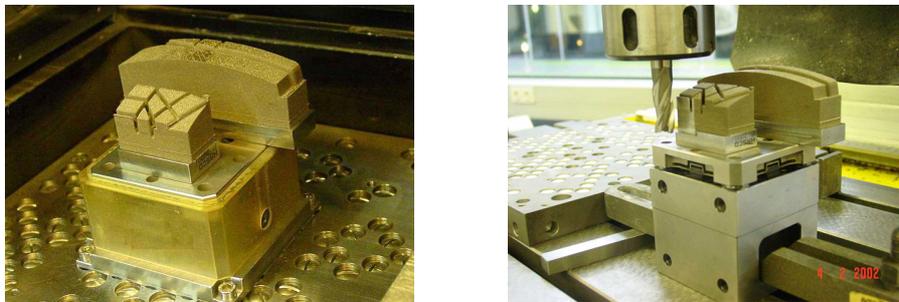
Positioning system for laser sintering (left), milling and die spotting (right)
